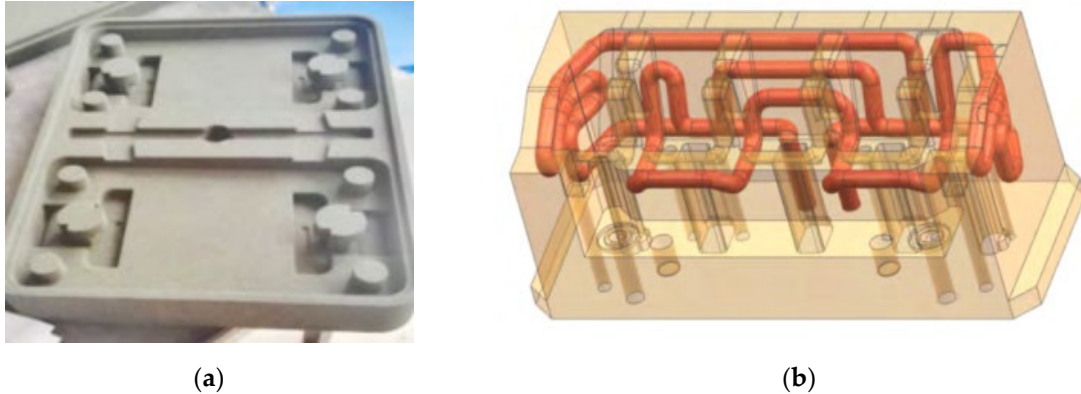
Moulds for making railway components, produced by 3D printing: (a) Mould for the fastener pad; (b) smart moulds with complex cooling channels. Retrieved from [55].
